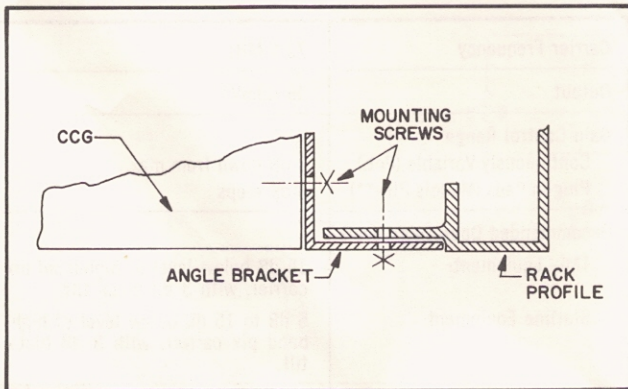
Angle Brackets installed for chassis top to be flush with rack front.
